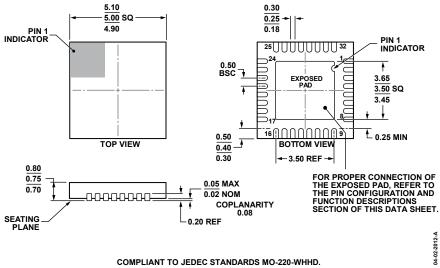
32-Lead Lead Frame Chip Scale Package [LFCSP_WQ] 5 mm × 5 mm Body, Very Very Thin Quad (CP-32-11) Dimensions shown in millimeters
